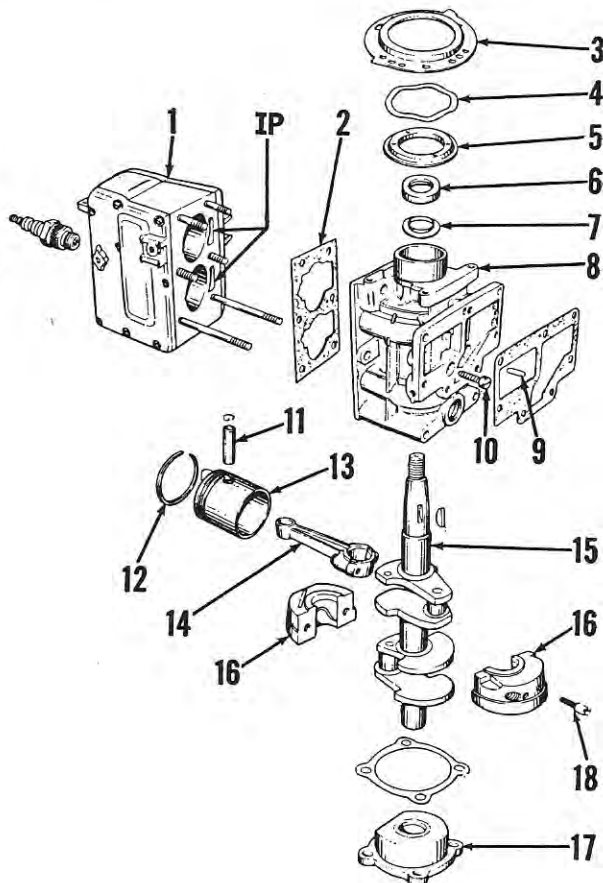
Exploded view of power head used on models 5S11 through 5S14. Model 5D11 is similar.
